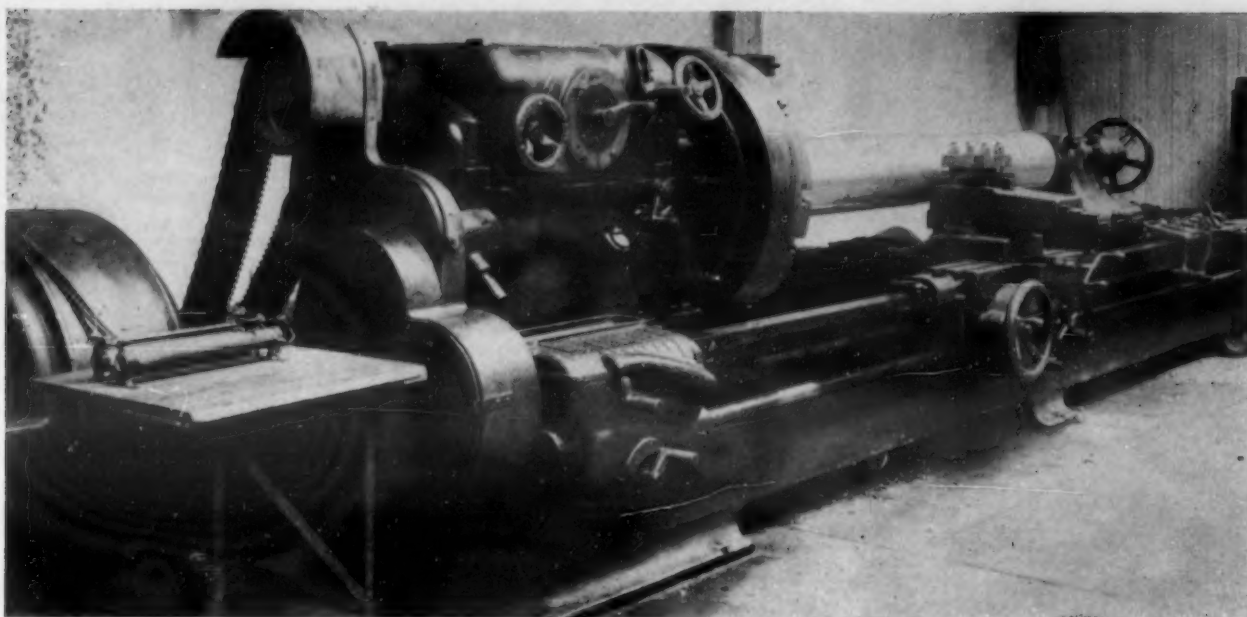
Equipment Used at the Bureau of Standards for Break Down Test of Lathe Tools
